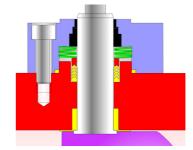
Series BR 23 Stainless Steel Rotary Plug Valve
